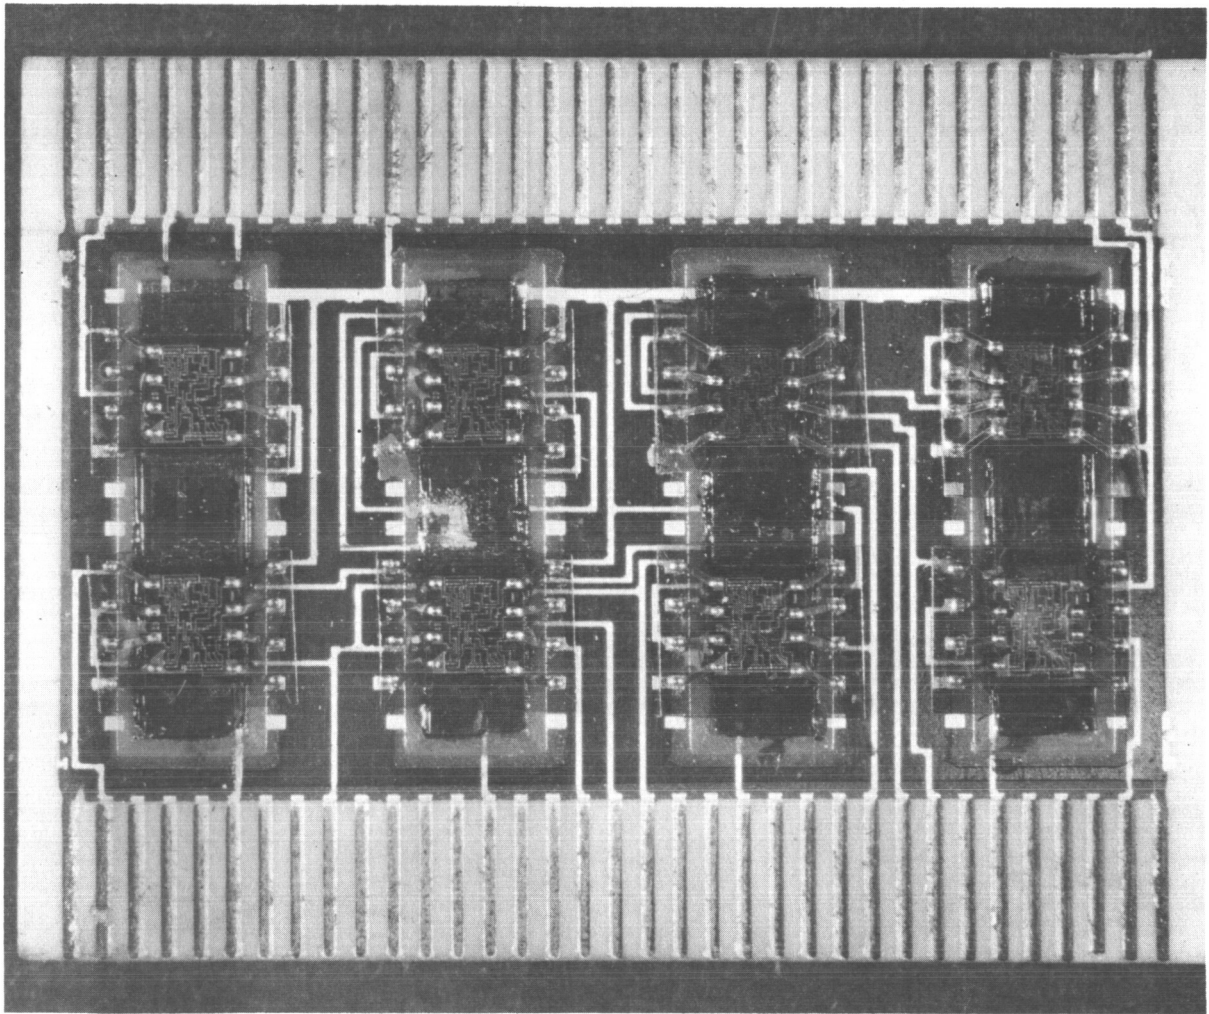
COMPLETELY ASSEMBLED PACKAGE
